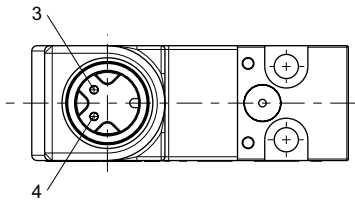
3/2-directional valve with pilot valve, push-in fitting M12x1
